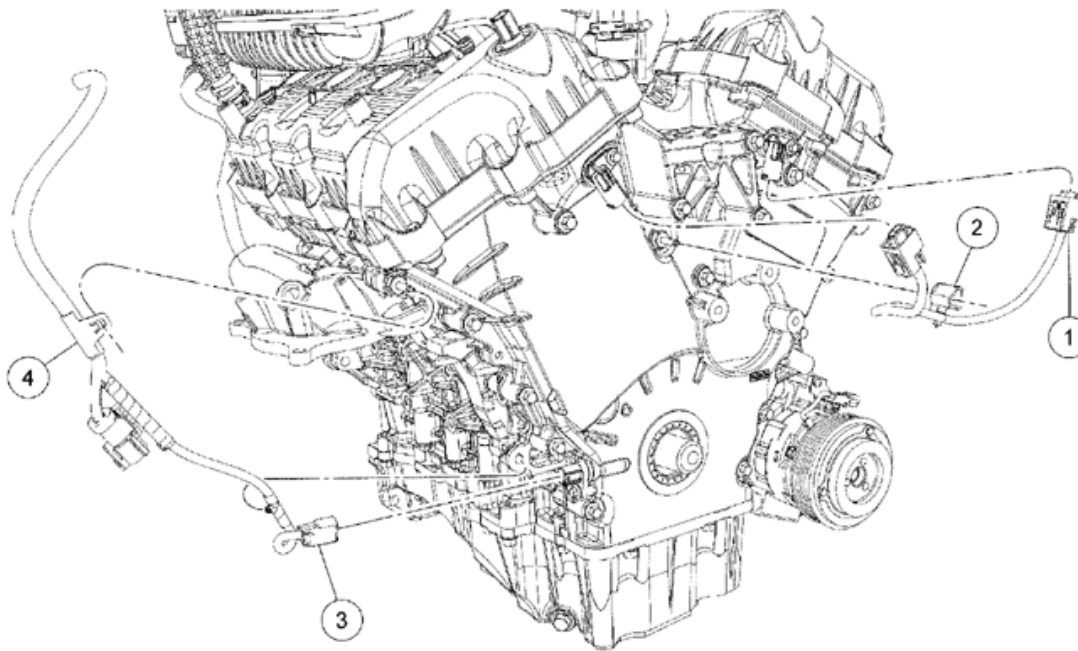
Identifying Engine Front Cover Components With Torque Specifications (View 1 Of 3)
